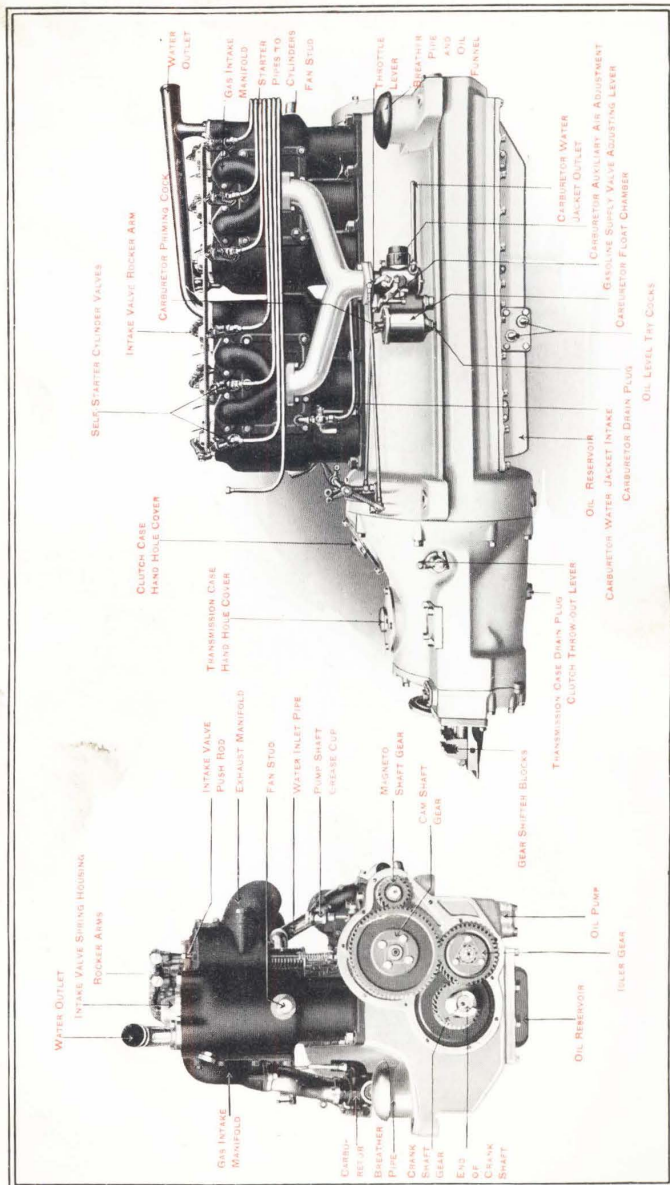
Intake Side and Front of Chalmers "Six" Motor
